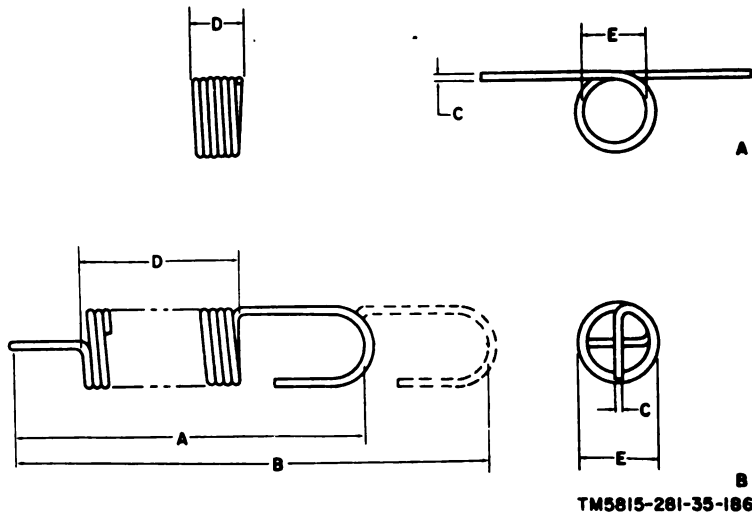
Tape cover spring, sensing lever spring, and sensing lever comb spring.
